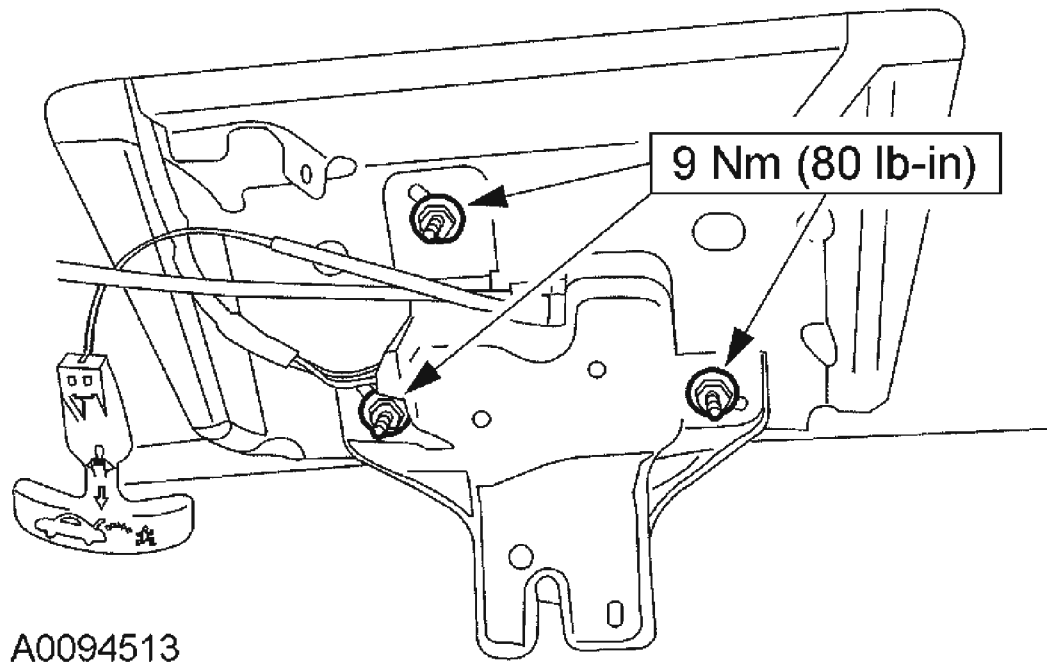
Removing Bolts And Luggage Compartment Lid Latch
